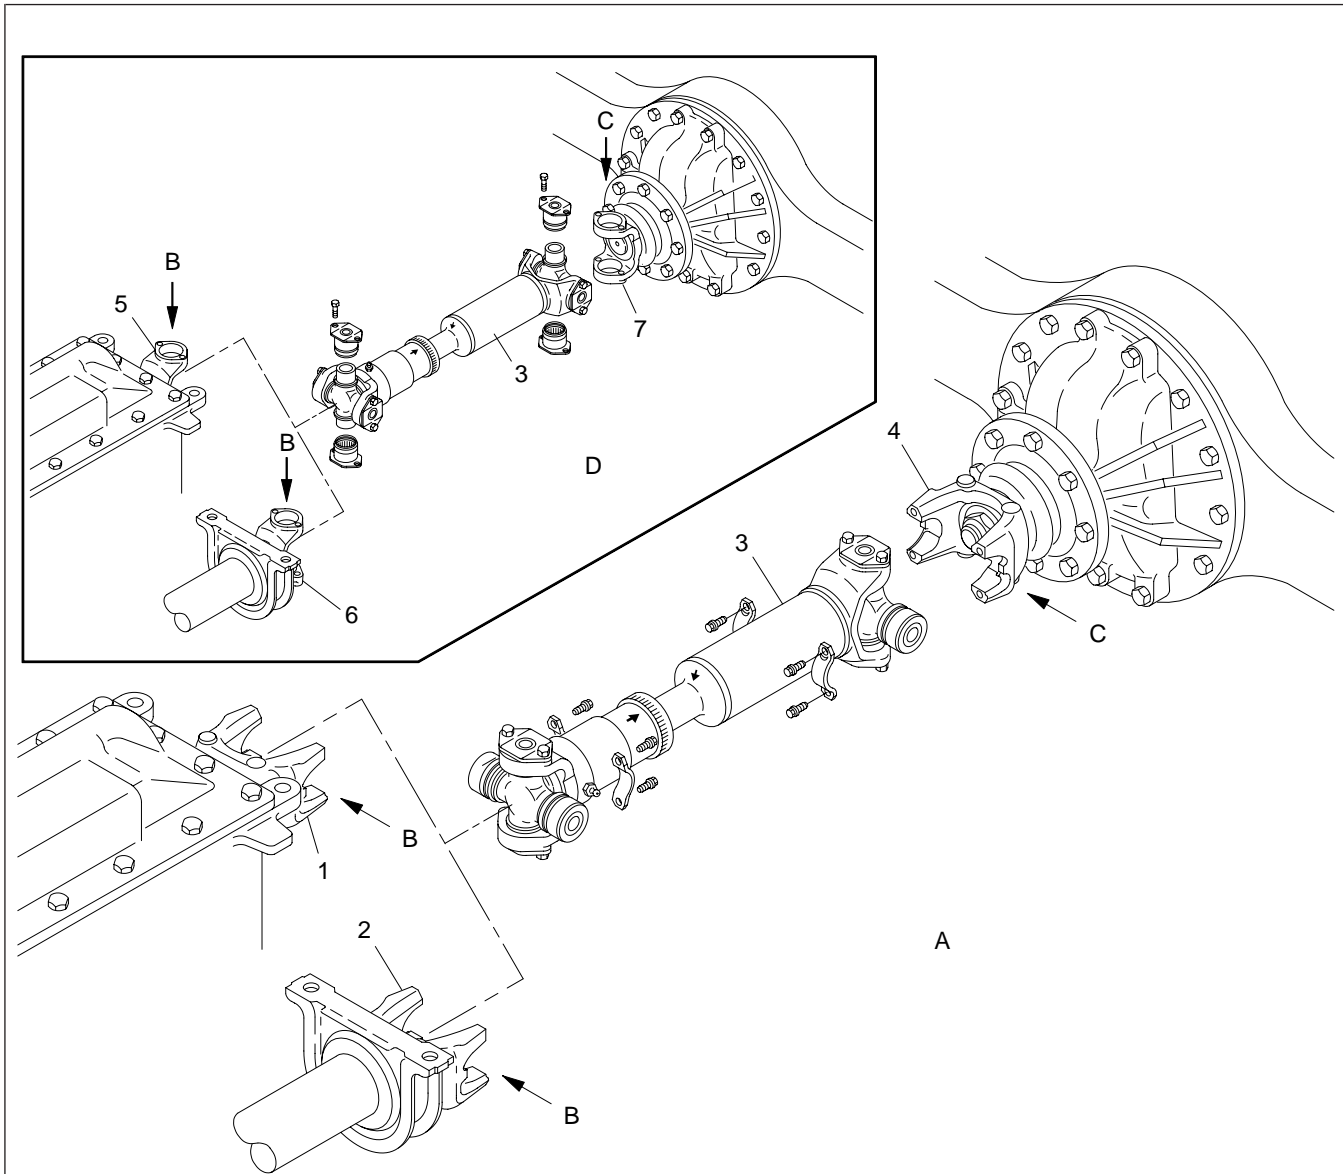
, Removal/Installation of a No. 3 Driveshaft With RPL U-Joints
